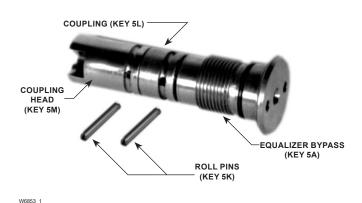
Equalizer Bypass and Coupling Assembly for NPS 1 through 6 / DN 25 through 150 Body Sizes
